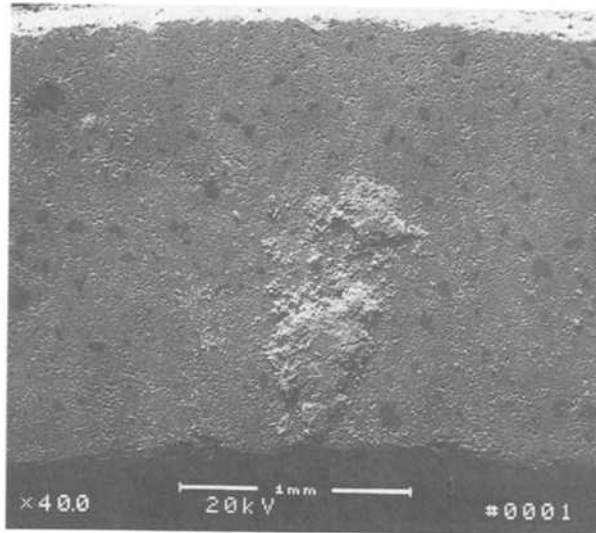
Leaking seal face with large discrete local deposit, primary ring.
